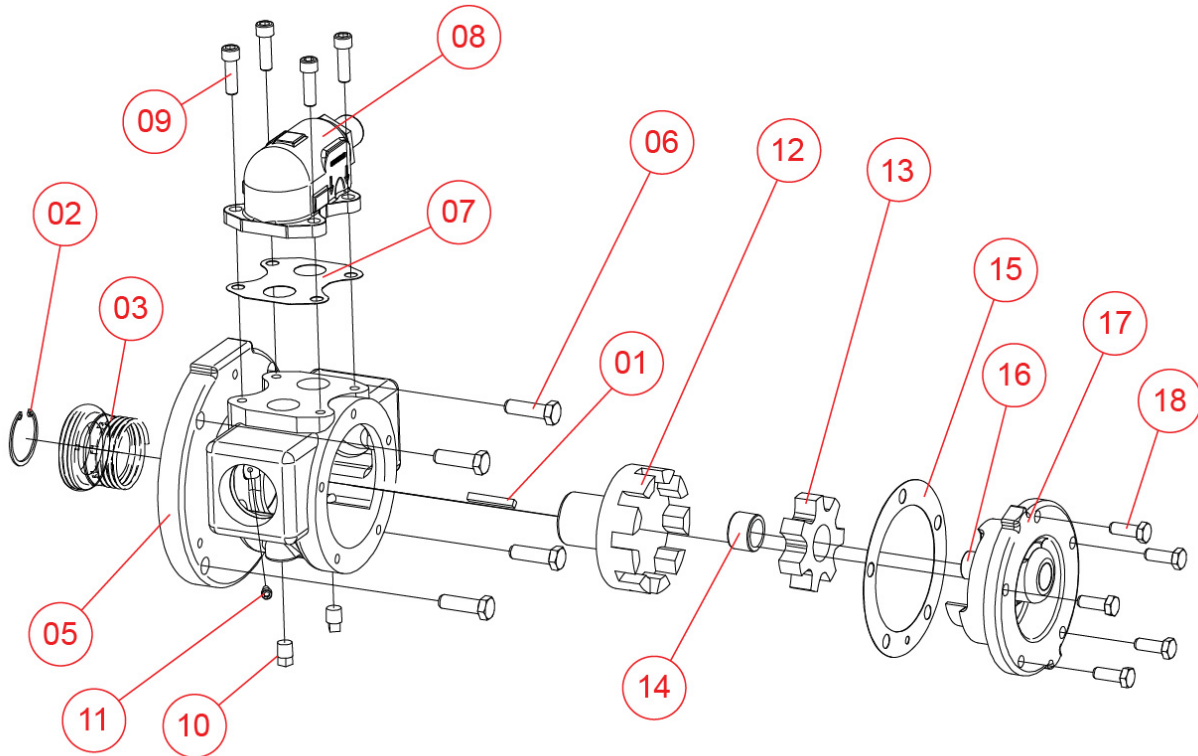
VV75G & VV75GG Exploded View - Cast Iron
